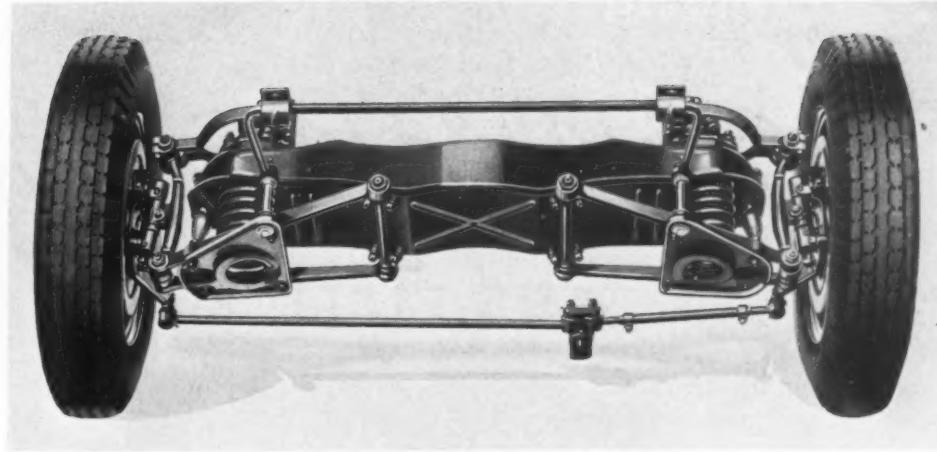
A new design is the Chevrolet steering gear pitman arm which transmits motion to the two transverse drag links, one to each wheel spindle arm
